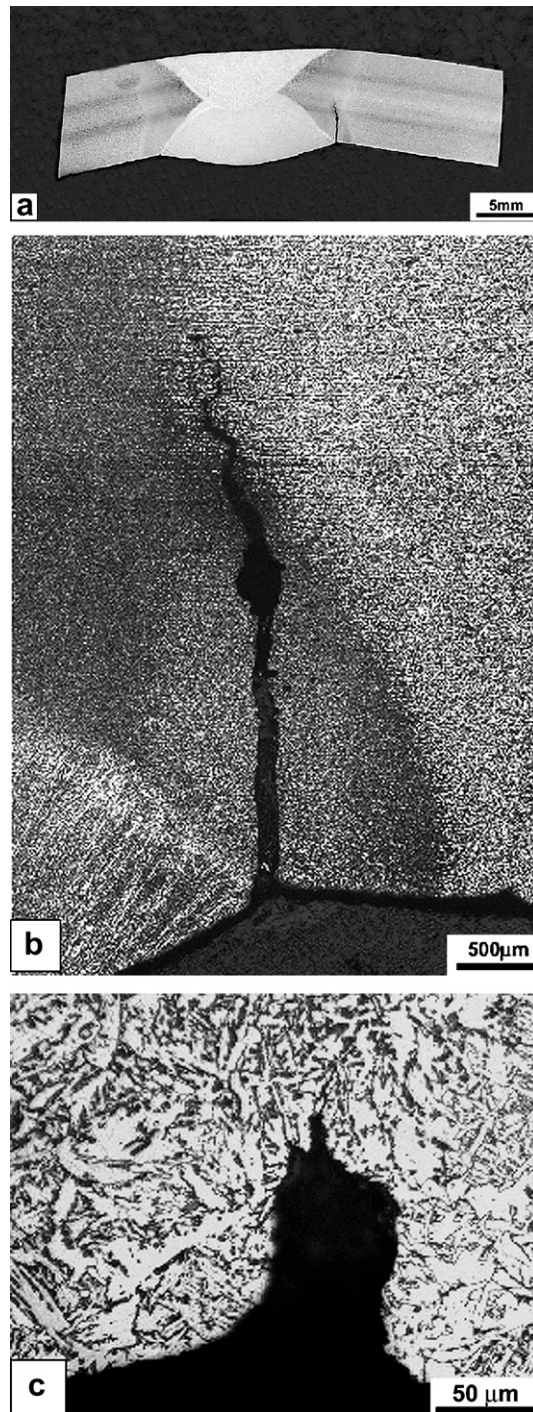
Microstructural examination – nital etching – welding region – transversal section: (a) general view showing primary cracking; (b) and (c) detail of the haz/welding region of the internal surface, right (b) and left position (c) showing detail of crack propagation path along the haz region (see (b)) and cracking associated to the presence of a welding defect (see (c)).
